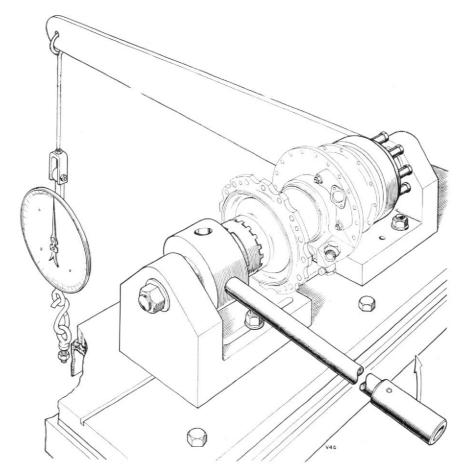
Torque fixture T.76700, stand T.74466, ring spanner T.72417, tommy bar T.76701 and extension T.76702, for removing hub shaft ring nut.
